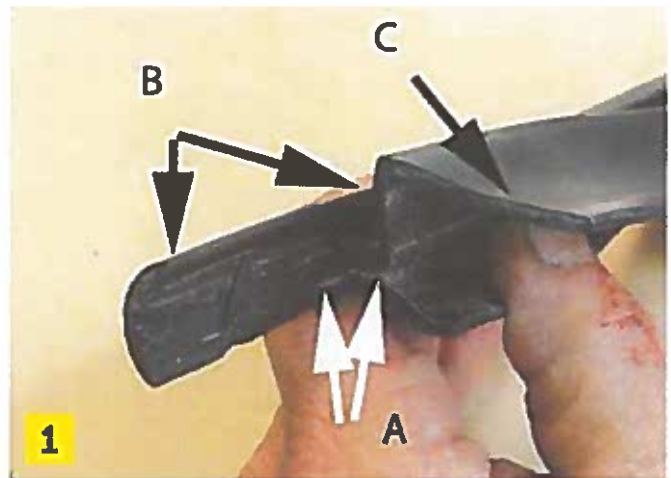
This is how the rear end of the scuttle seal (driver's side shown) on 6-cylinder roadsters should be trimmed. The slot, A, slides over the shroud flange. The mounting rivets pass only through the flap being held down a bit by my thumb. Trim away material back to the shroud corner to create a flap, B. The upper flap, C, lies under the dash pad.
